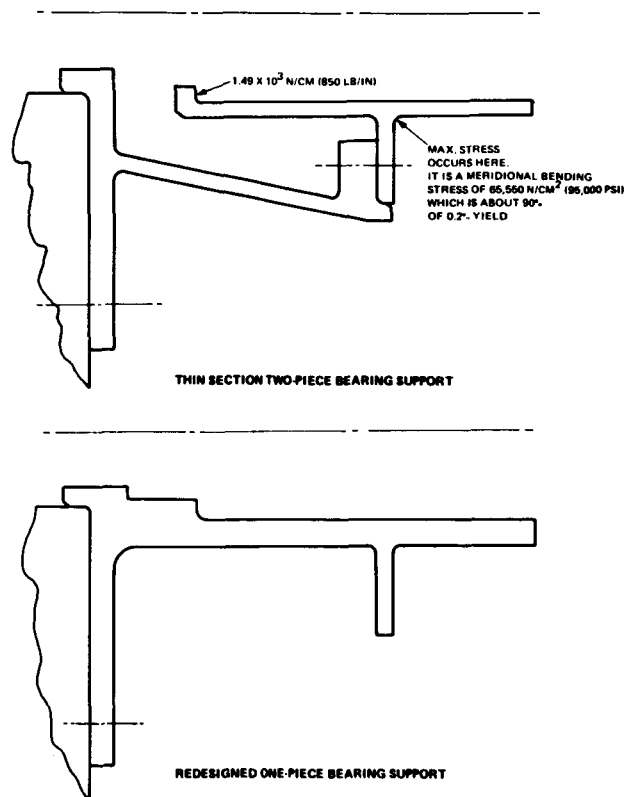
Duplex Bearing Support for the Mainshaft Seal Rig
